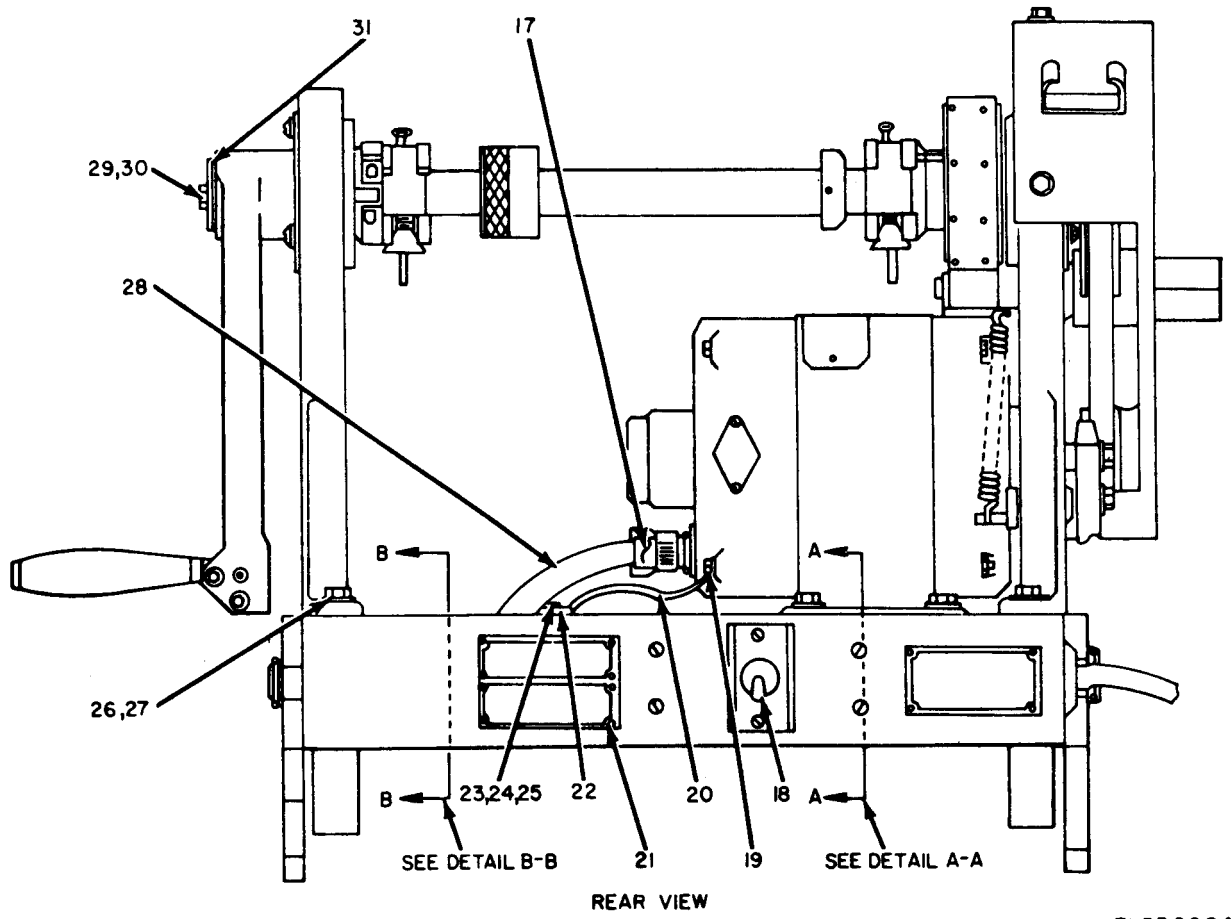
Reeling Machines, Cable, Motor Driven RL-172/G and RL-172A/G (Sheet 2 of 3).
